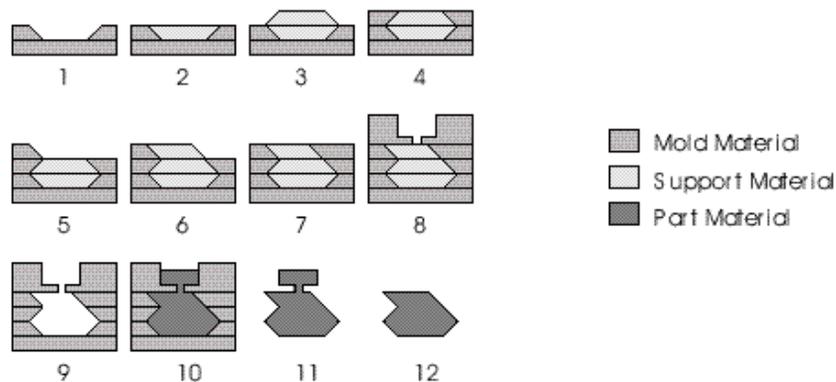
Schematic representation of the Mold SDM process: the mold is constructed layer by layer. After that, the support material is dissolved and the ceramic part is gel-cast.
